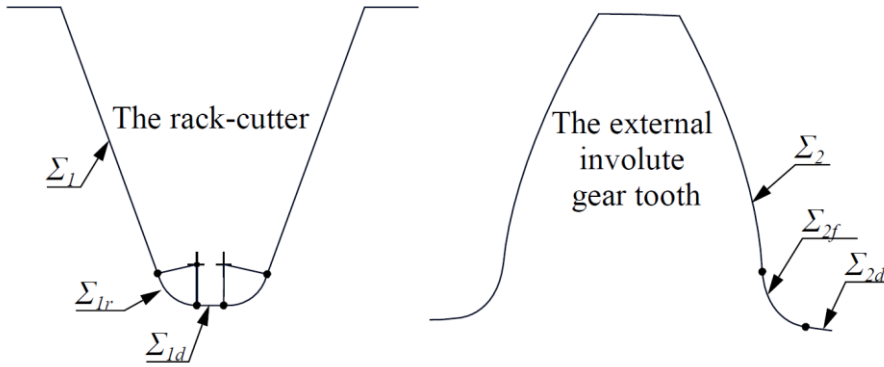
Generating parts of rack-cutter and the corresponding generated parts of external spur gear tooth
